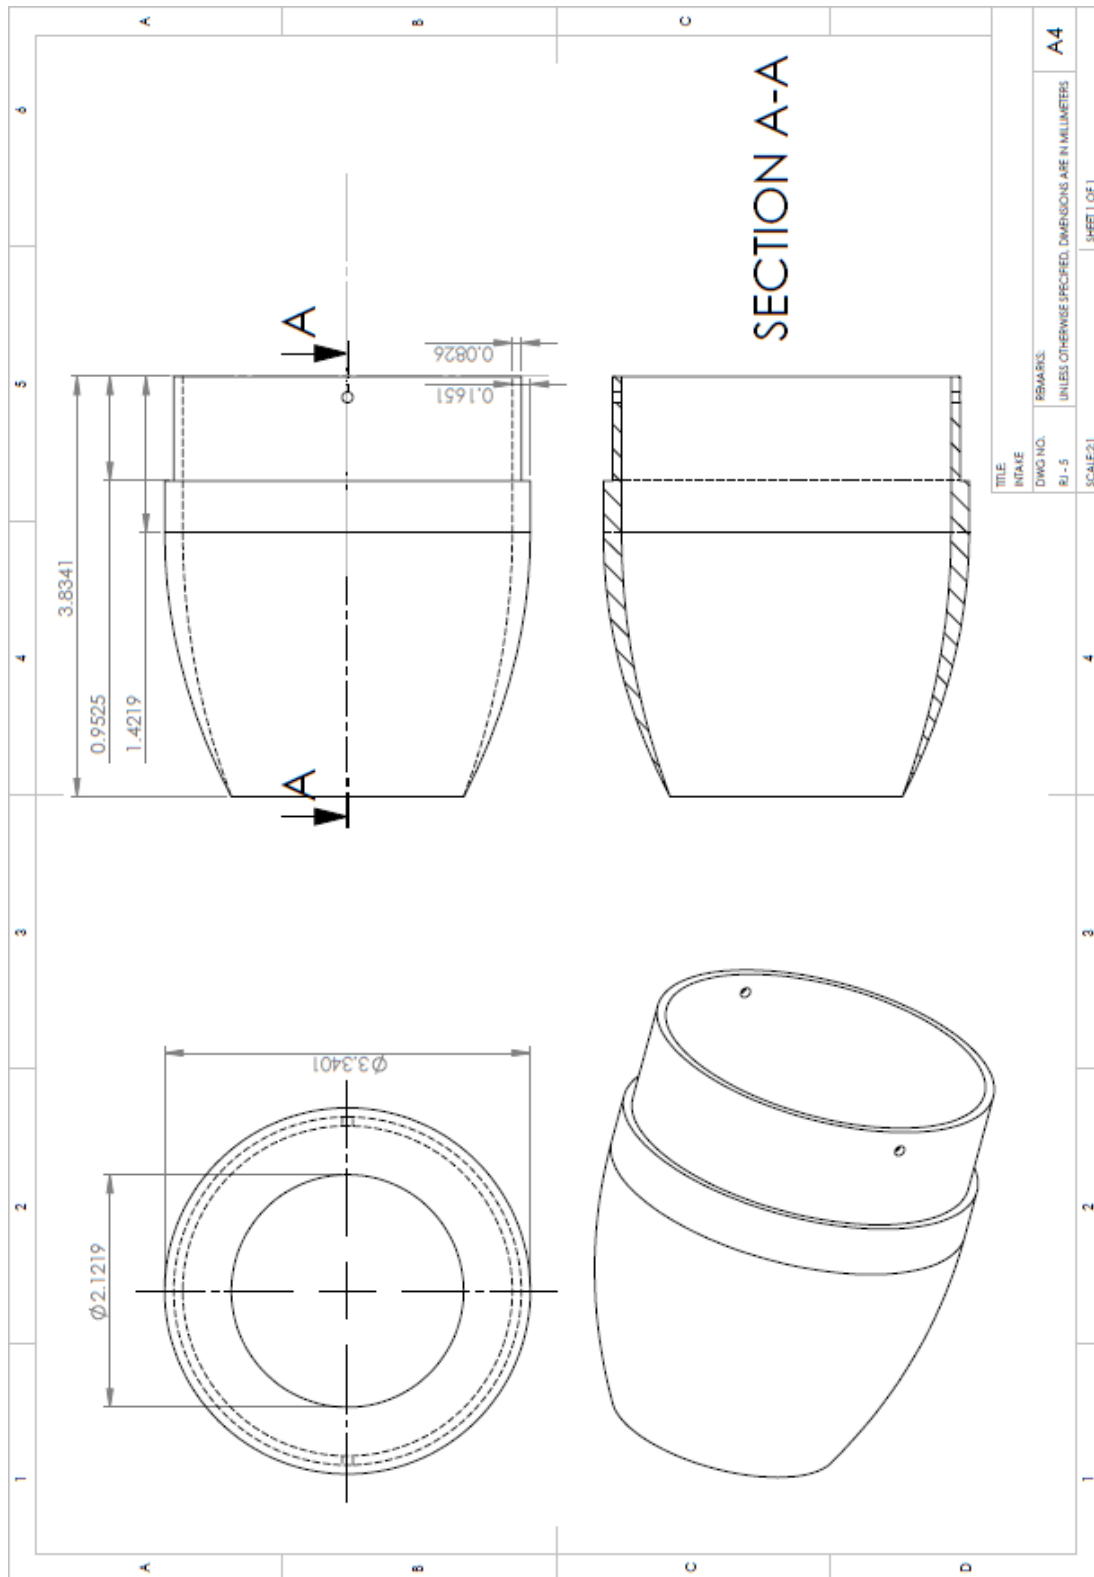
Part drawing: Ramjet intake (RJ – 5)
